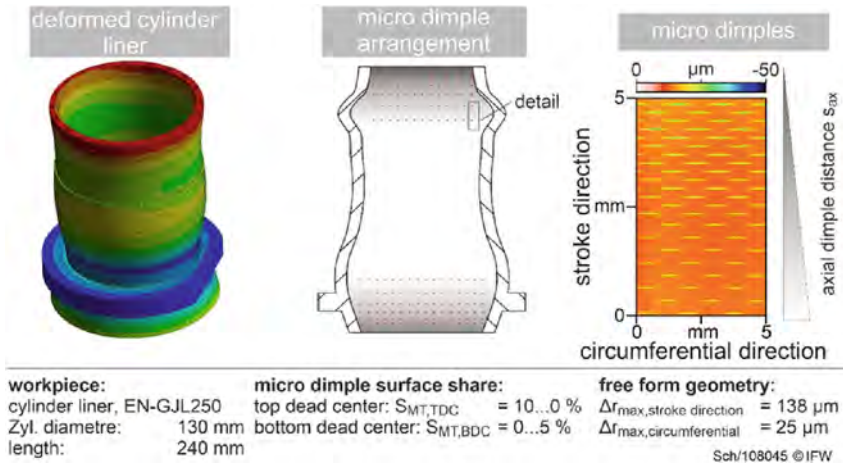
Non-circularly machined cylinder liner with applied micro dimples
